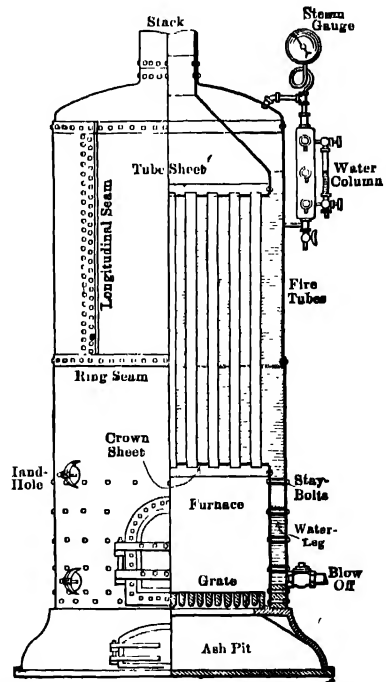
Vertical Tubular Boiler with Submerged Tube Sheet.
